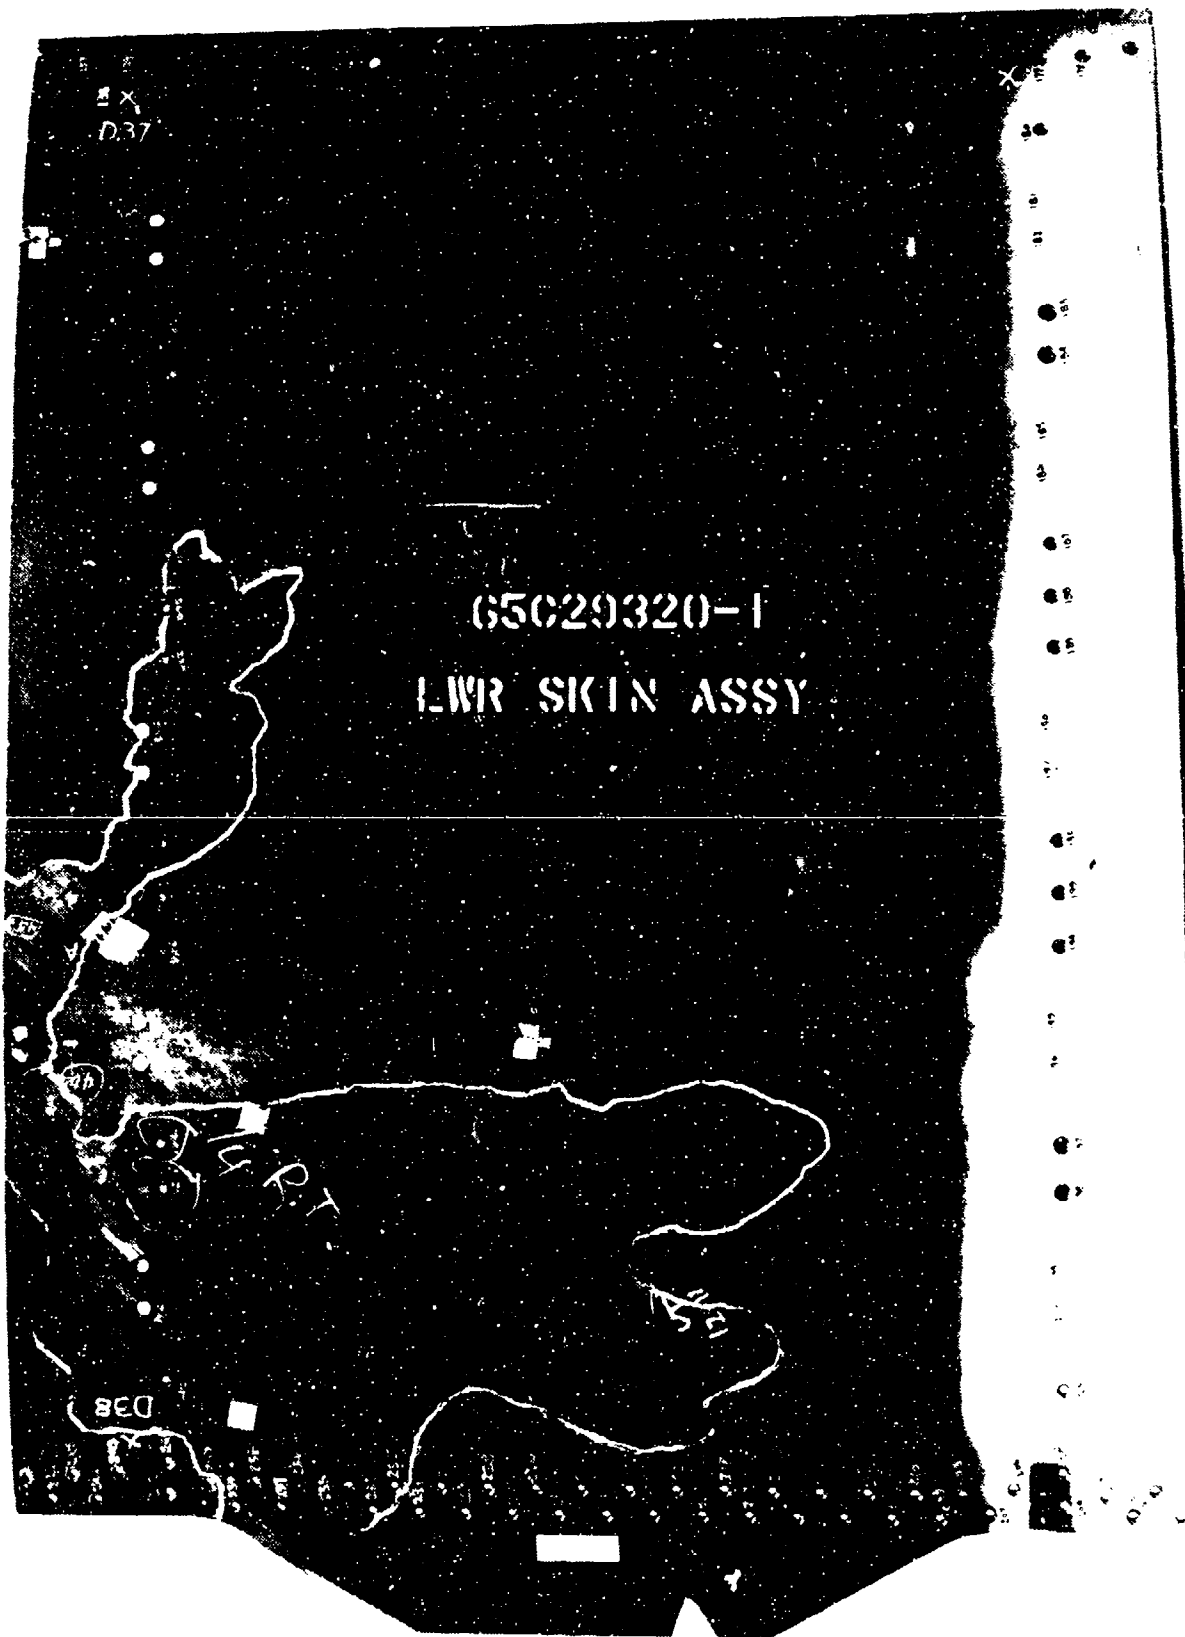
J4X Wing Test Box Lower Skin Surface
